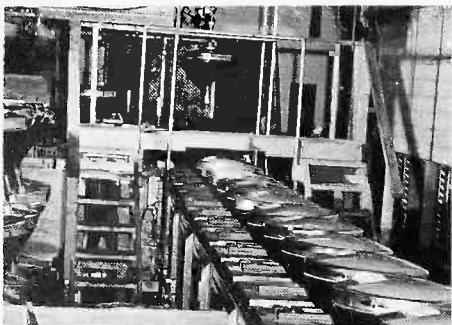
Color tubes' last mile of production is conveyed to exhaust machine.
